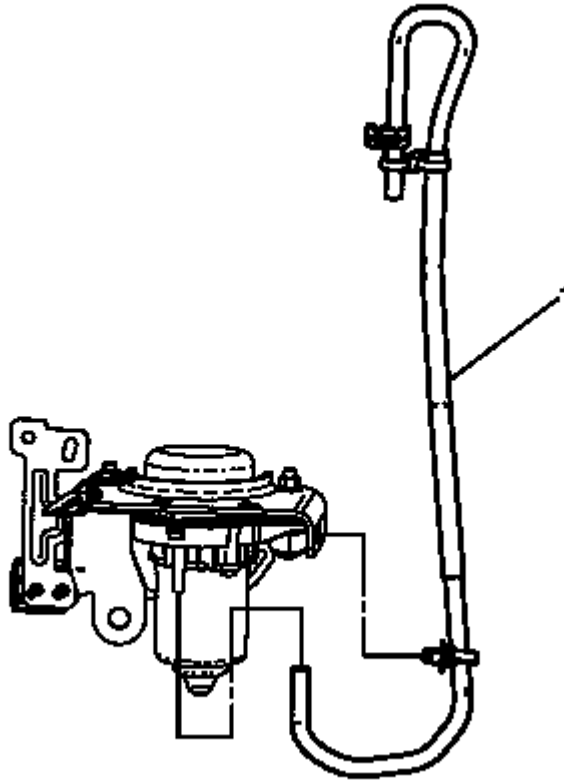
Power Brake Booster Pump Ventilation Hose And Bracket Assembly
